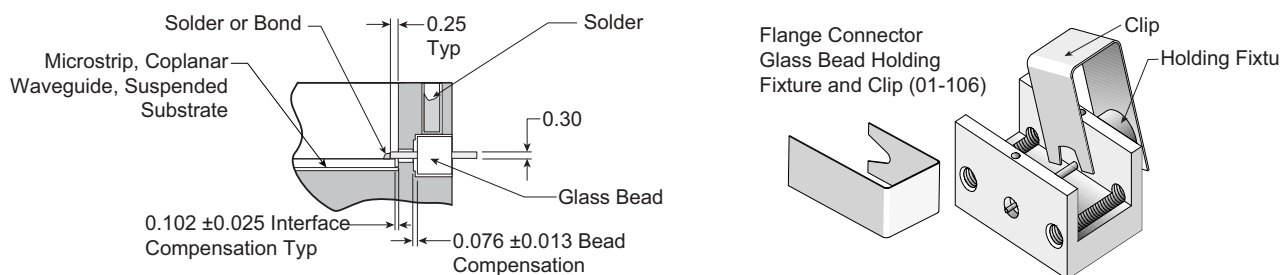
K103M-R or EK103M-R Glass Bead Assembly
